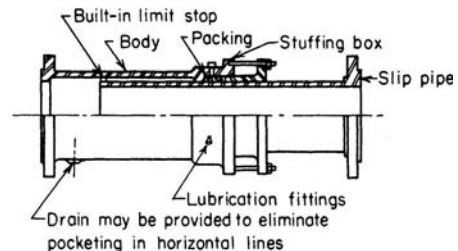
Slip-type expansion joint. (From Kellogg, Design of Piping Systems, Wiley, New York, 1965.)
